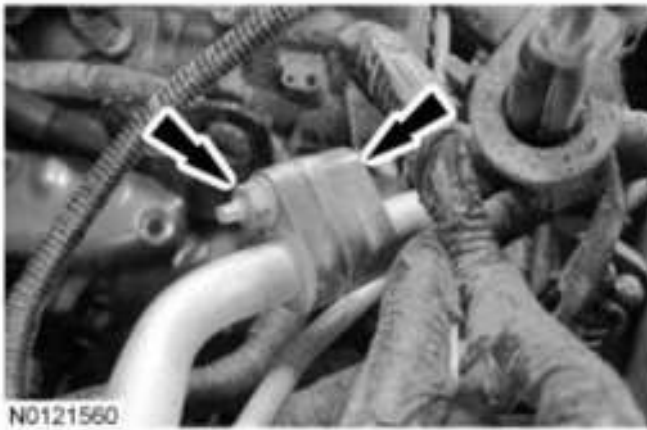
Locating A/C Tube O-Ring Seal And Gasket
